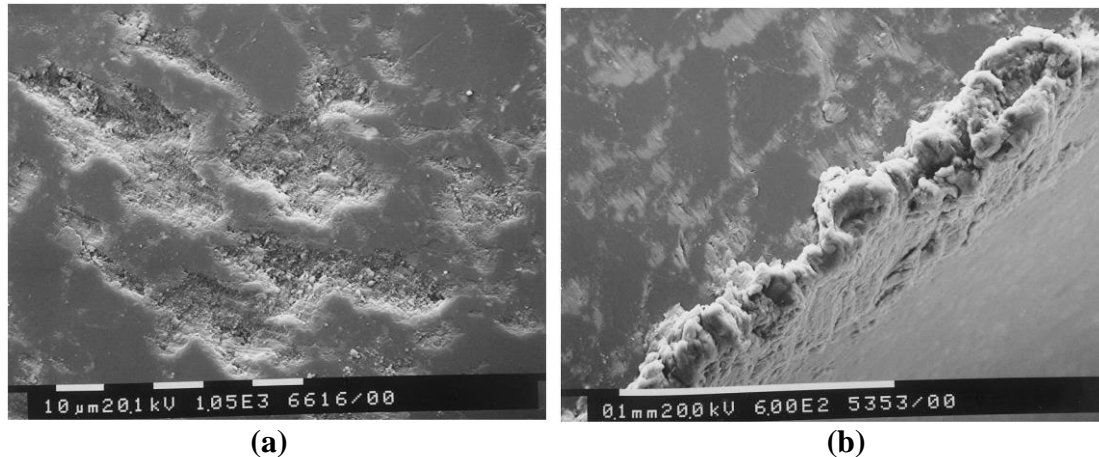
Tool wear mechanisms (a) abrasive wear forming grooves (b) adhesive wear forming BUE [14].
